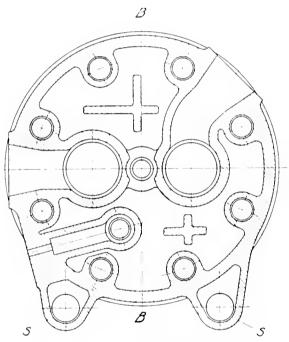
Cross-section of Cylinder Head shown in Fig. 8
